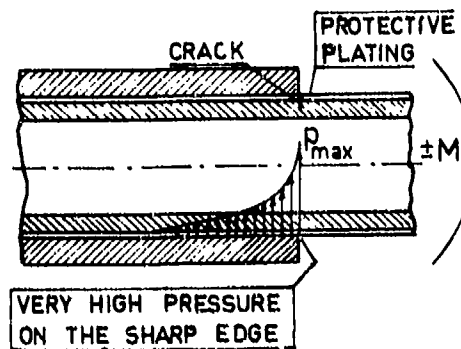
Fretting damage in bending due to a sharp edge
